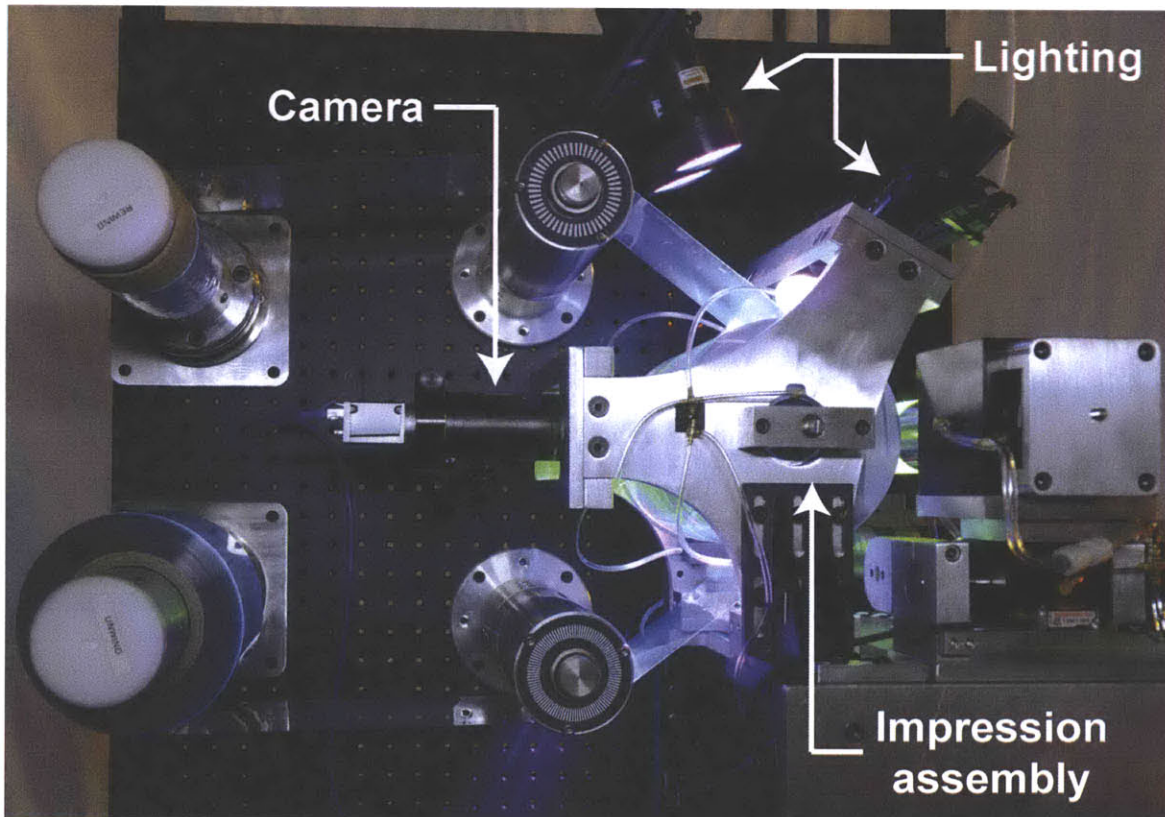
Impression roll camera and lighting system implemented on the roll-to-roll machine
